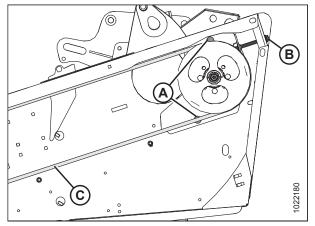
Non-Timed Double-Knife DriveKnife Drive (Belt Guide Removed for Clarity)
